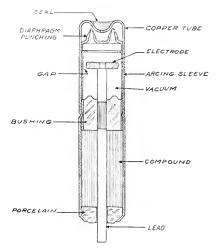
Sectional Drawing of Vacuum Tube Lightning Arrester
